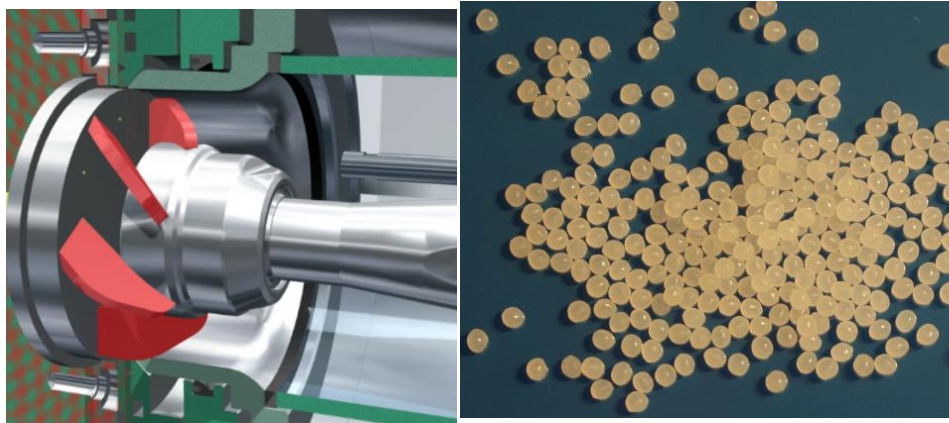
Hot die face cutting (Picture courtesy of Automatik Plastics Machinery GmbH)
